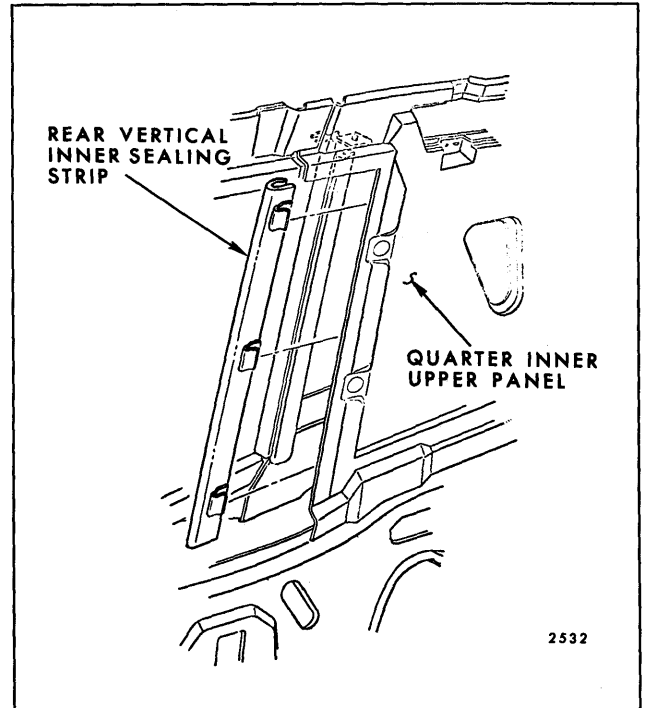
Rear Quarter Window Rear Vertical Inner Sealing Strip Assembly "C-47" Styles
